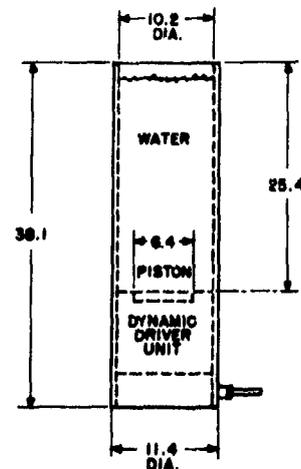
Dimensions (in centimeters), type G19 calibrator.
